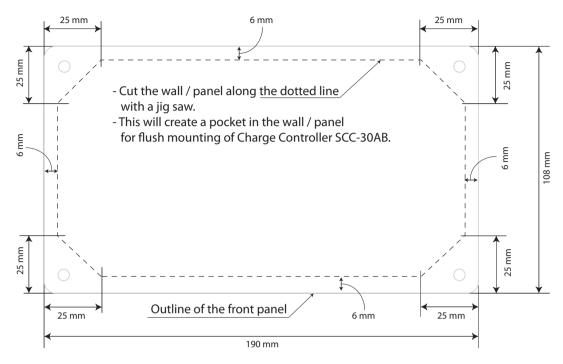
Drawing for making the cut-out in the wall / panel
